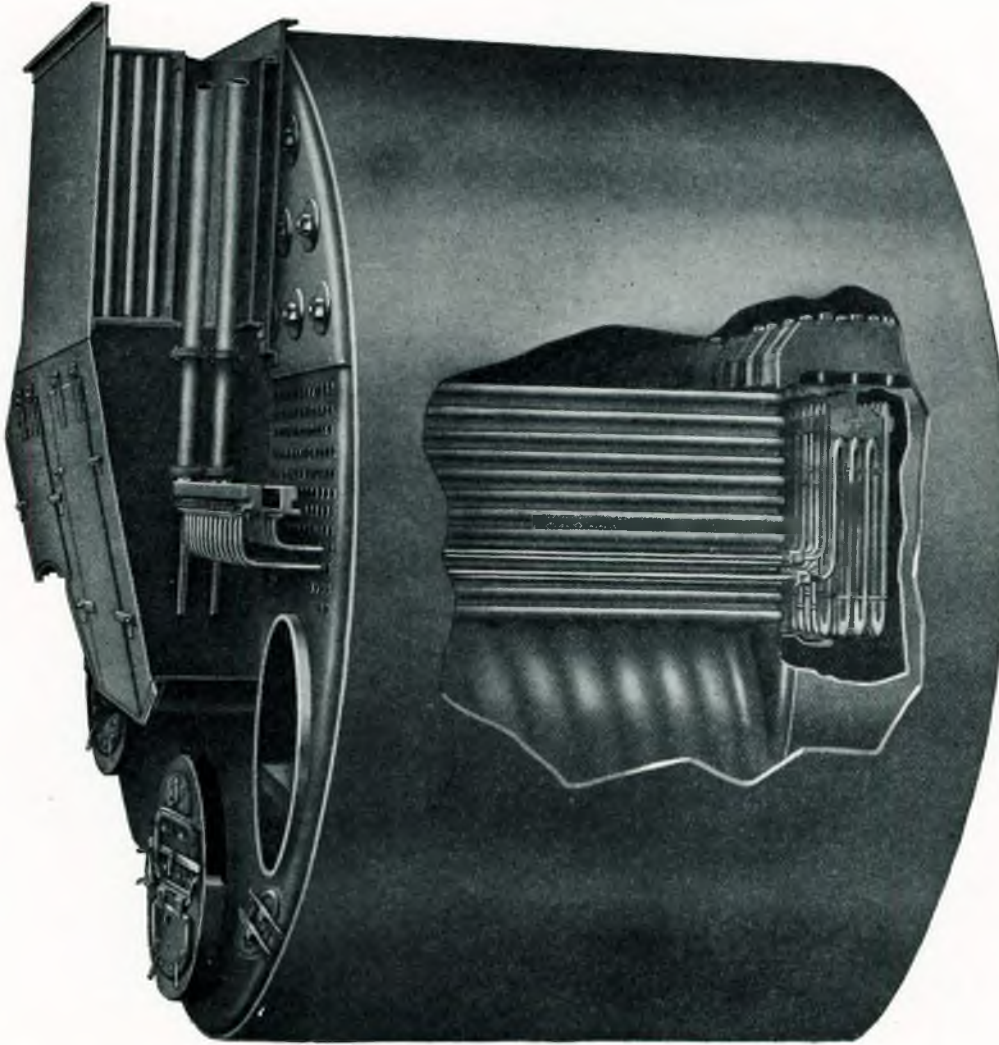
Arrangement of combustion chamber superheater in three-furnace boiler; elements fitted in wing chambers only.
